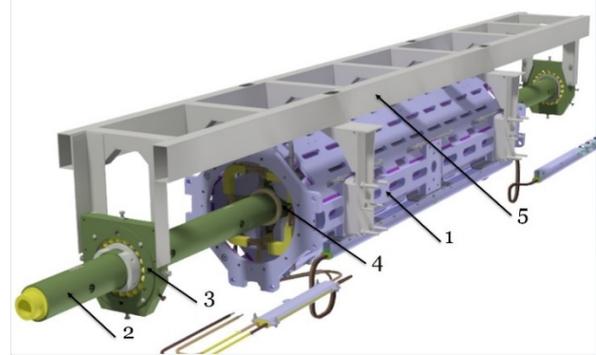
Measuring probe inside the quadrupole magnet: 1 - quadrupole magnet; 2 - probe; 3 - outside self-aligning ceramic ball bearings and adjustable housings; 4 - inside precision ceramic ball bearing with small clearance and tolerances; 5 - frame.
